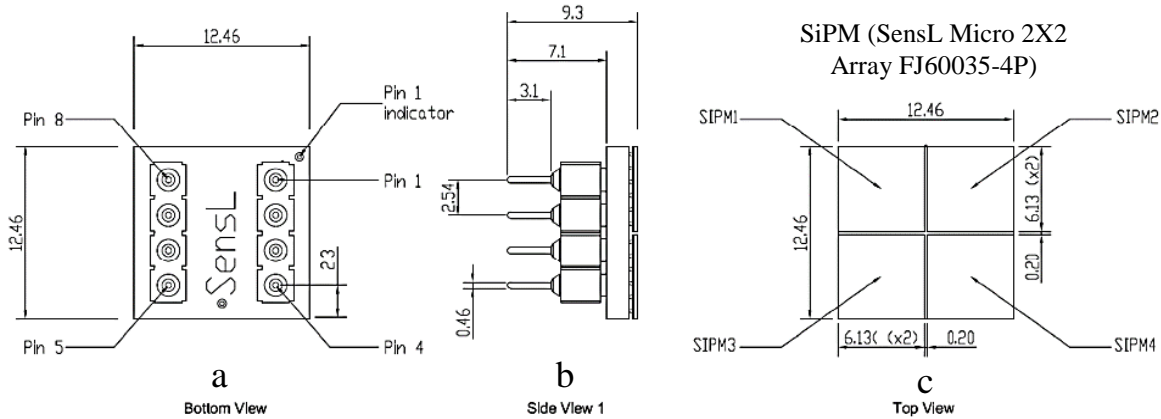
(a) Bottom schematic view of the SensL ARRAYJ-60035-4P-PCB evaluation board. (b) Schematic side view of the whole unit in which SensL Micro 2x2 Array FJ60035-4P SiPM mounted to SensL ARRAYJ-60035-4P-PCB evaluation board. (c) Schematic top view of the SensL Micro 2x2 Array FJ60035-4P SiPM. (Extracted from Manufacturer's Technical Report with permission.) [129]
